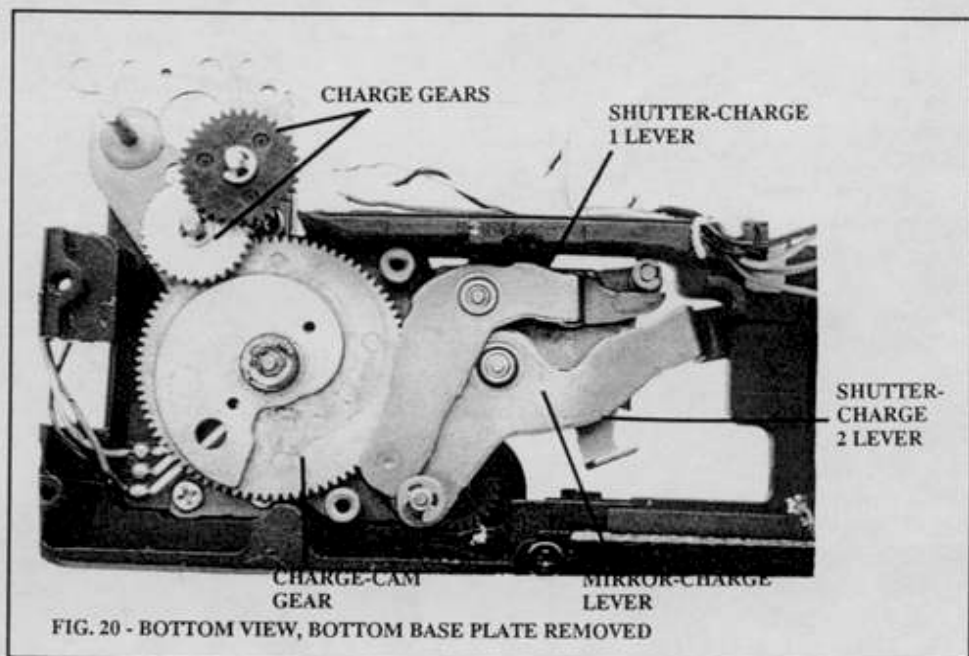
BOTTOM VIEW, BOTTOM BASE PLATE REMOVED
